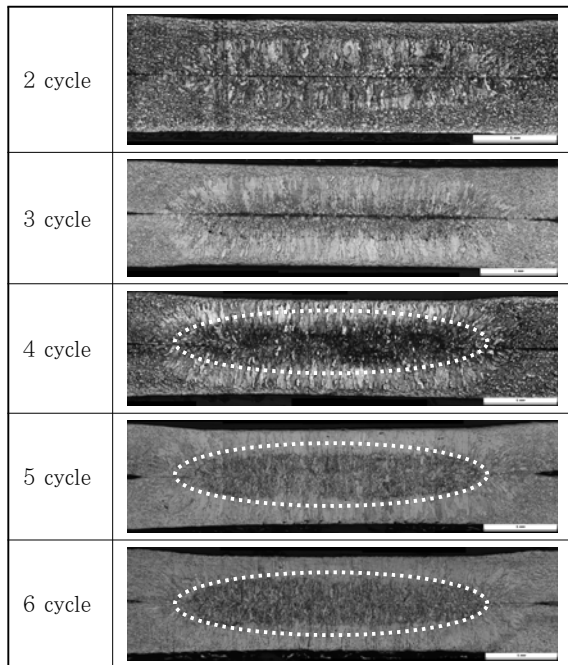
Macro photographs of resistance spot welds for T-H steel with changes of weld cycles. (weld force : 250kgf, weld current : 10kA)
